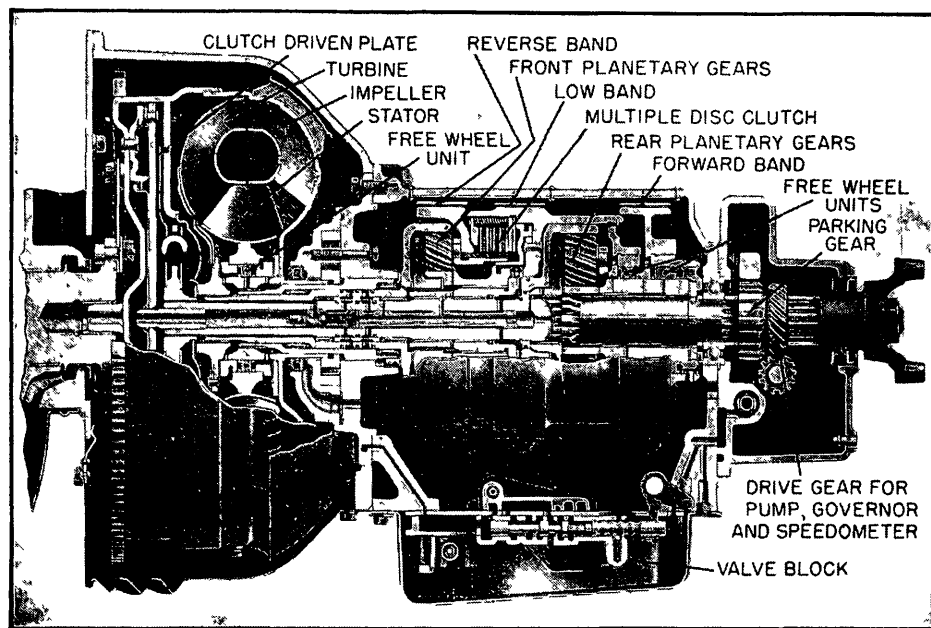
Sectional view of Automatic Transmission. 1950-52
